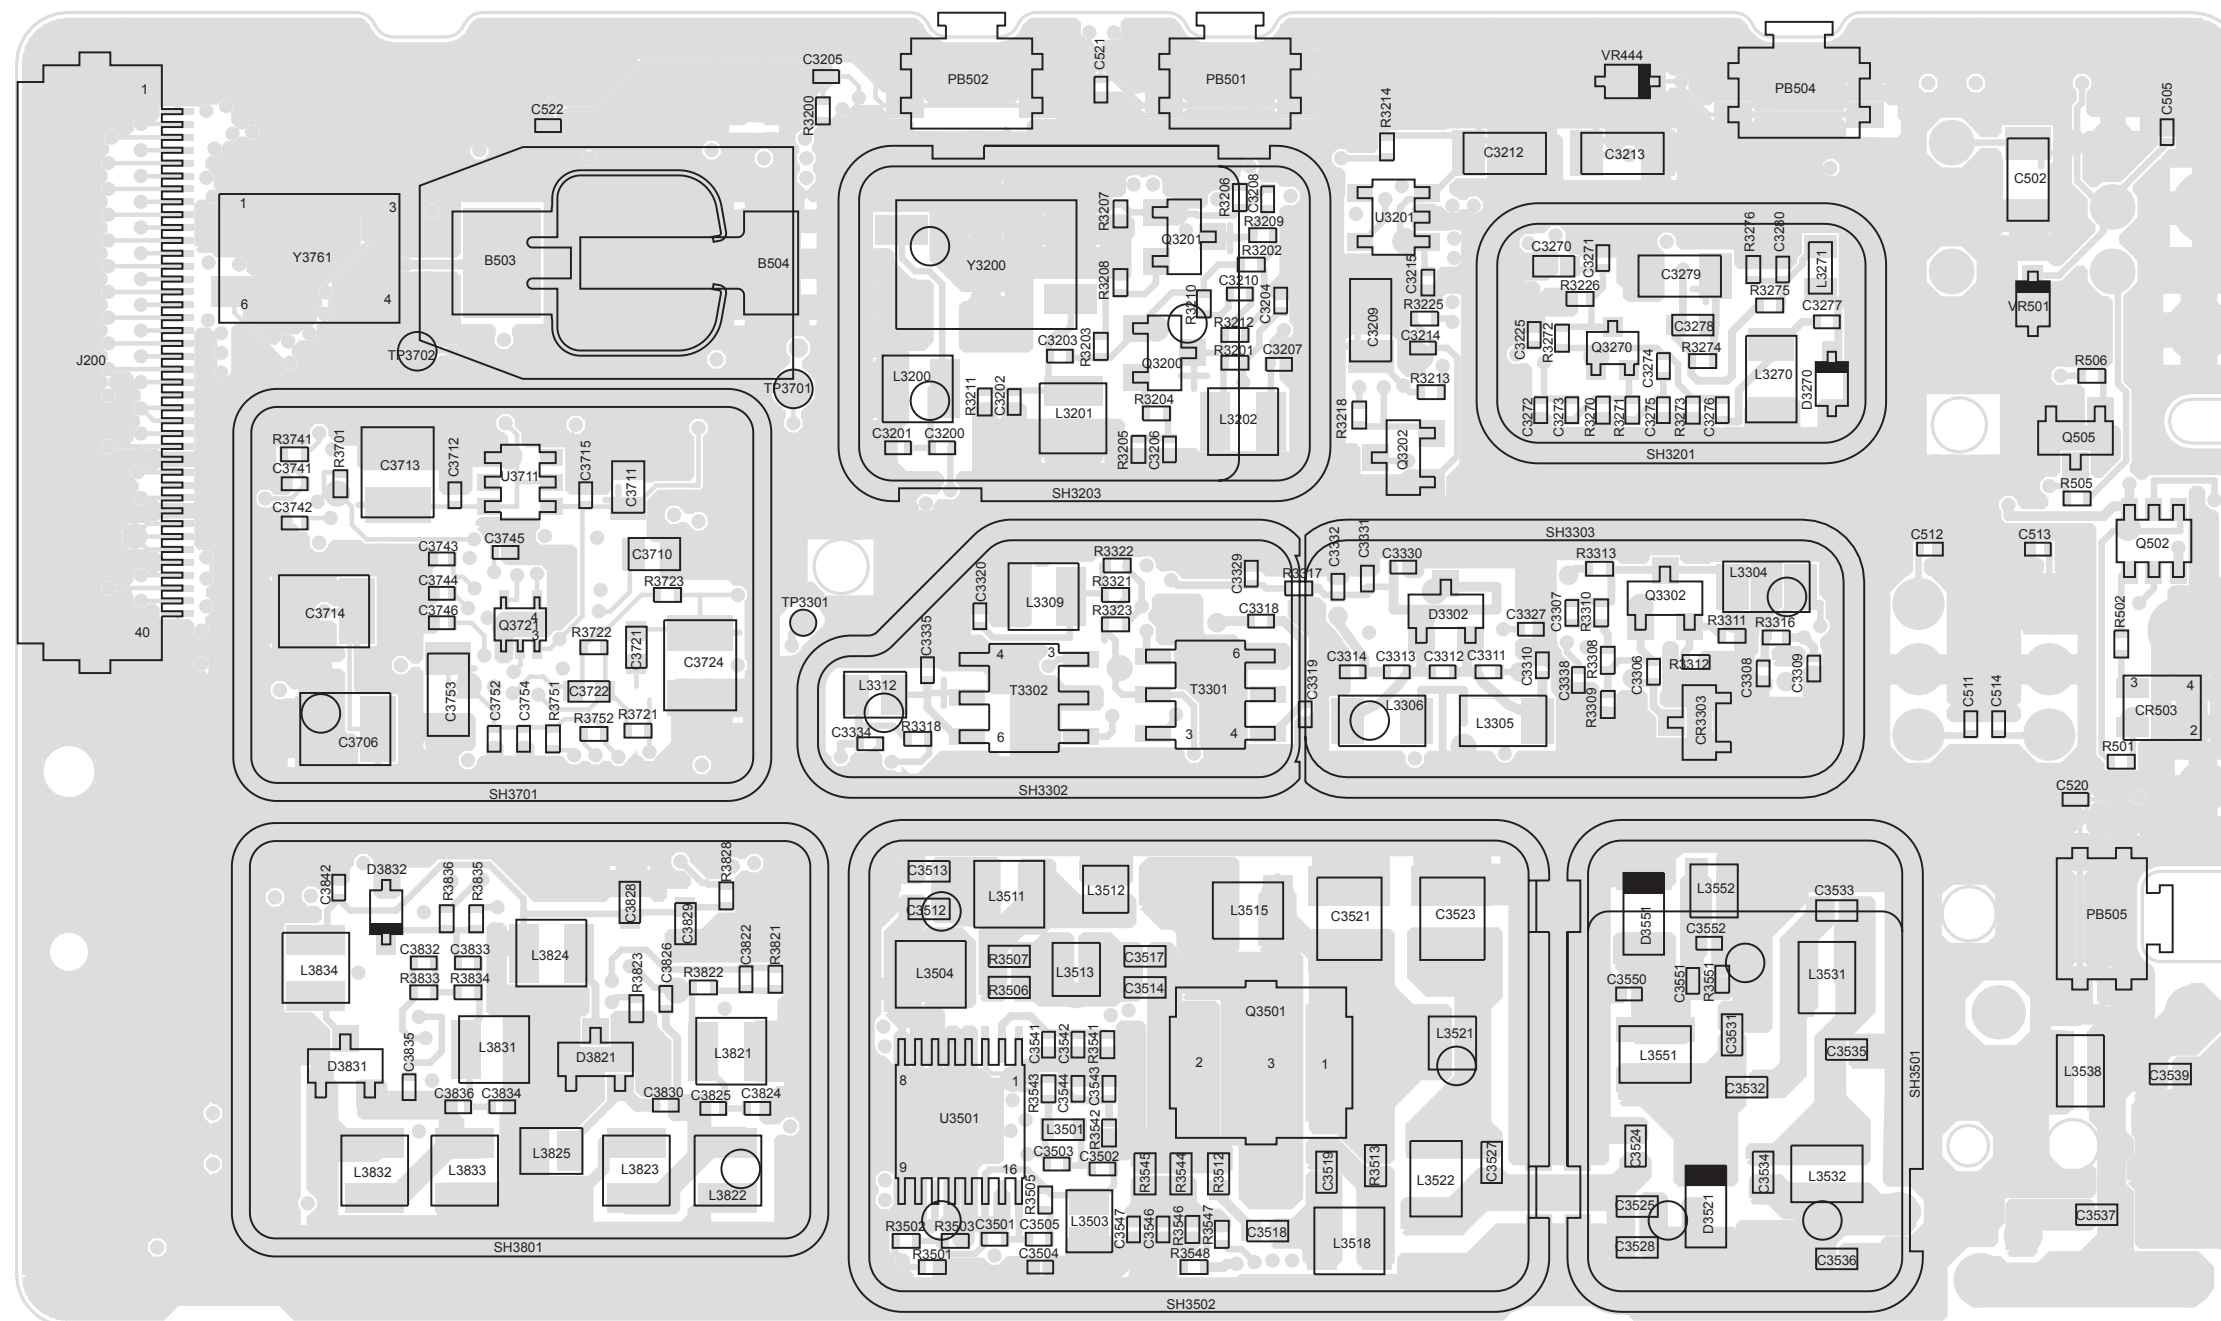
VHF (136-174MHz) Main Board Top Side PCB No. 8486062B12
